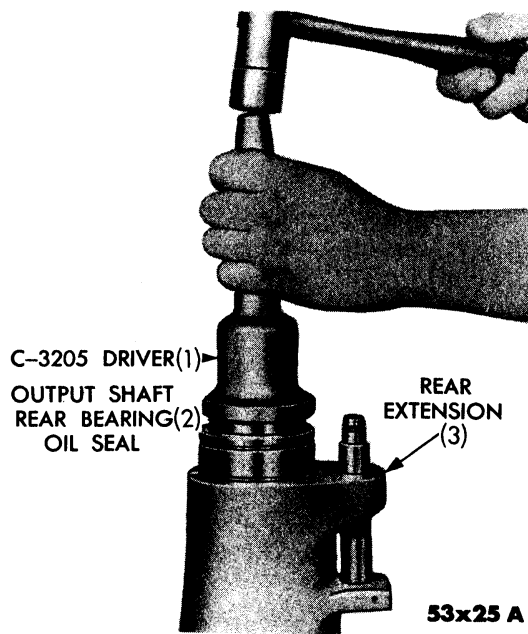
Installing Output Shaft Rear Bearing Oil Seal
